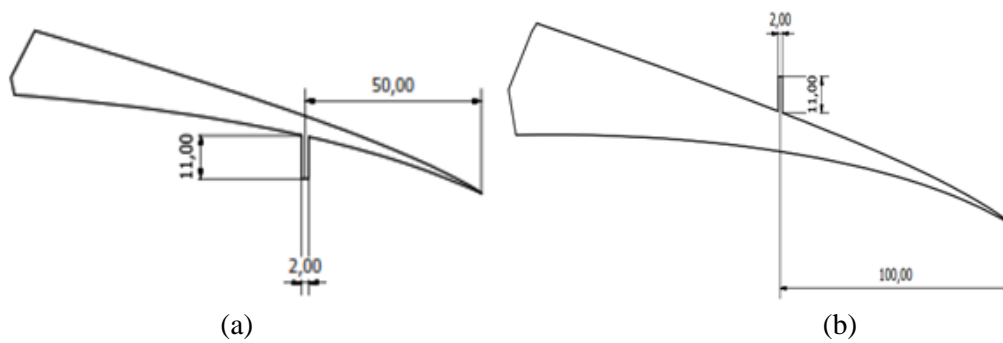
Detail tab location (a) tab lower surface , (b) tab upper surface.
